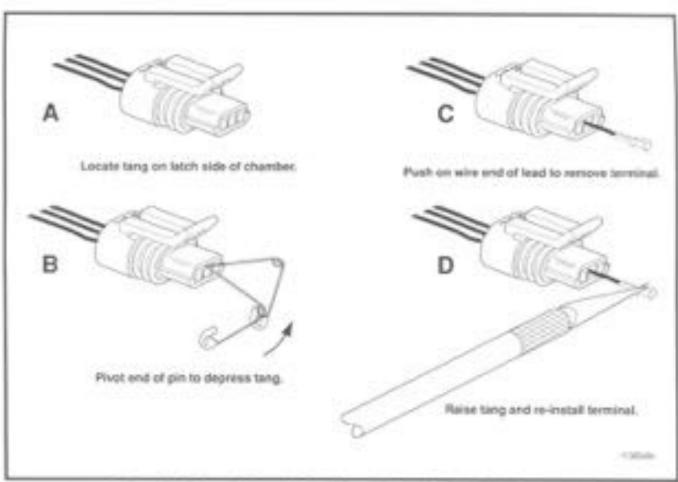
Depress Tang and Extract Terminal From Meting End of Connector
